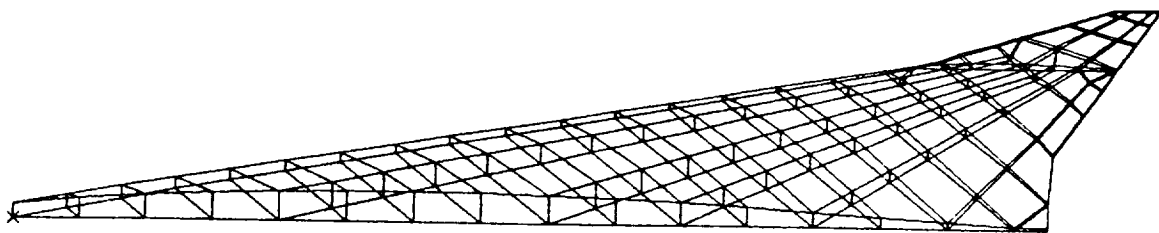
Spars And Rib Lay-Out Of The Wing Section
